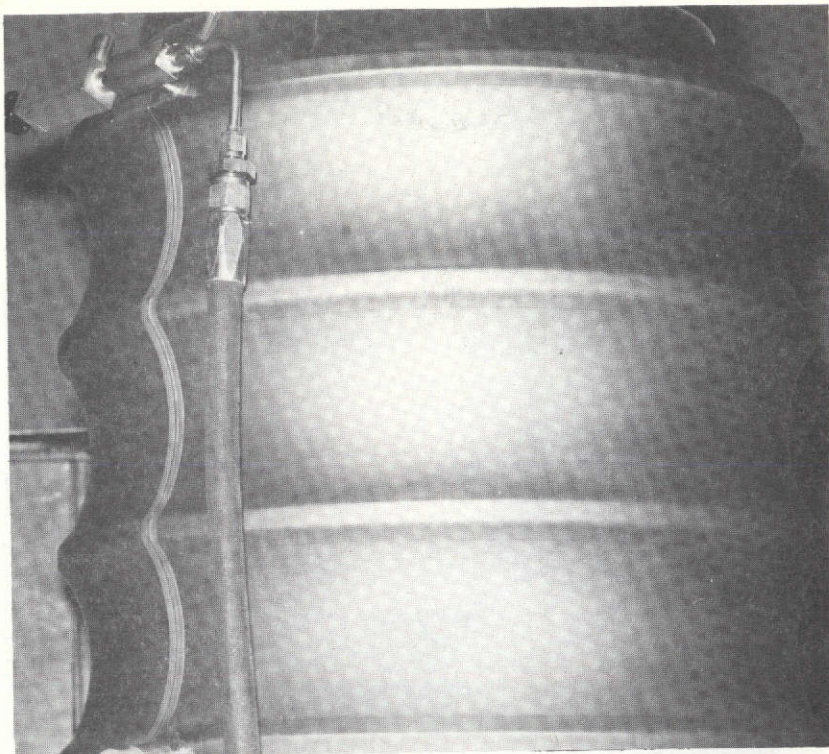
Assembly #1, Zero Vacuum Pressure
